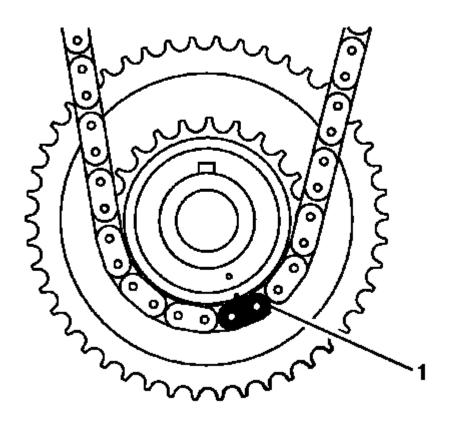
Timing Chain Retention Tool On Exhaust Side Courtesy of GENERAL MOTORS COMPANY
